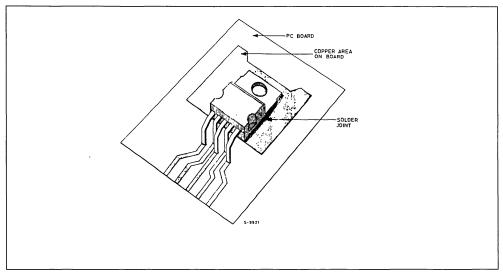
Pentawatt Soldered on Copper Heatsink on P.C Board.
